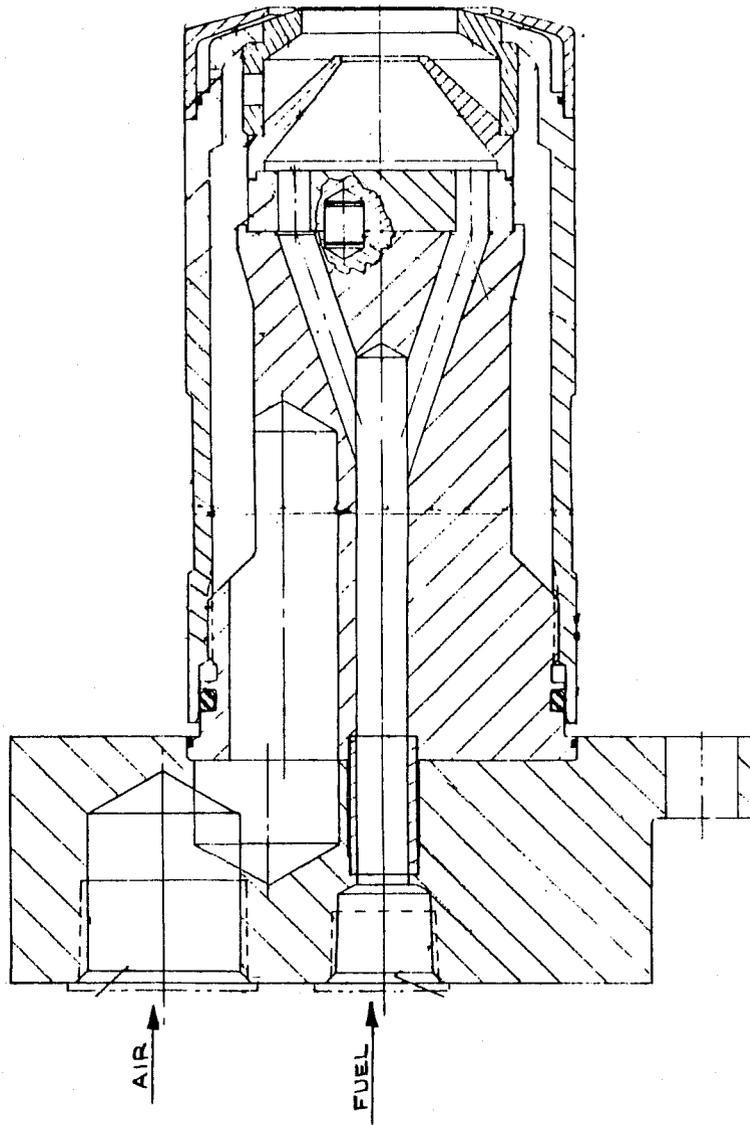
Assembly Drawing of Parker Hannifin CWM Nozzle
